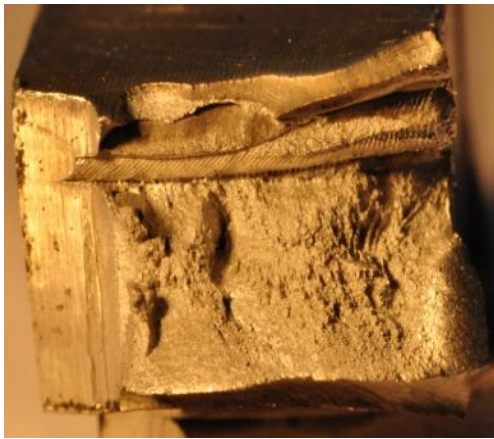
₁. Macrophoto. fracture (600rpm,75mm/min)
